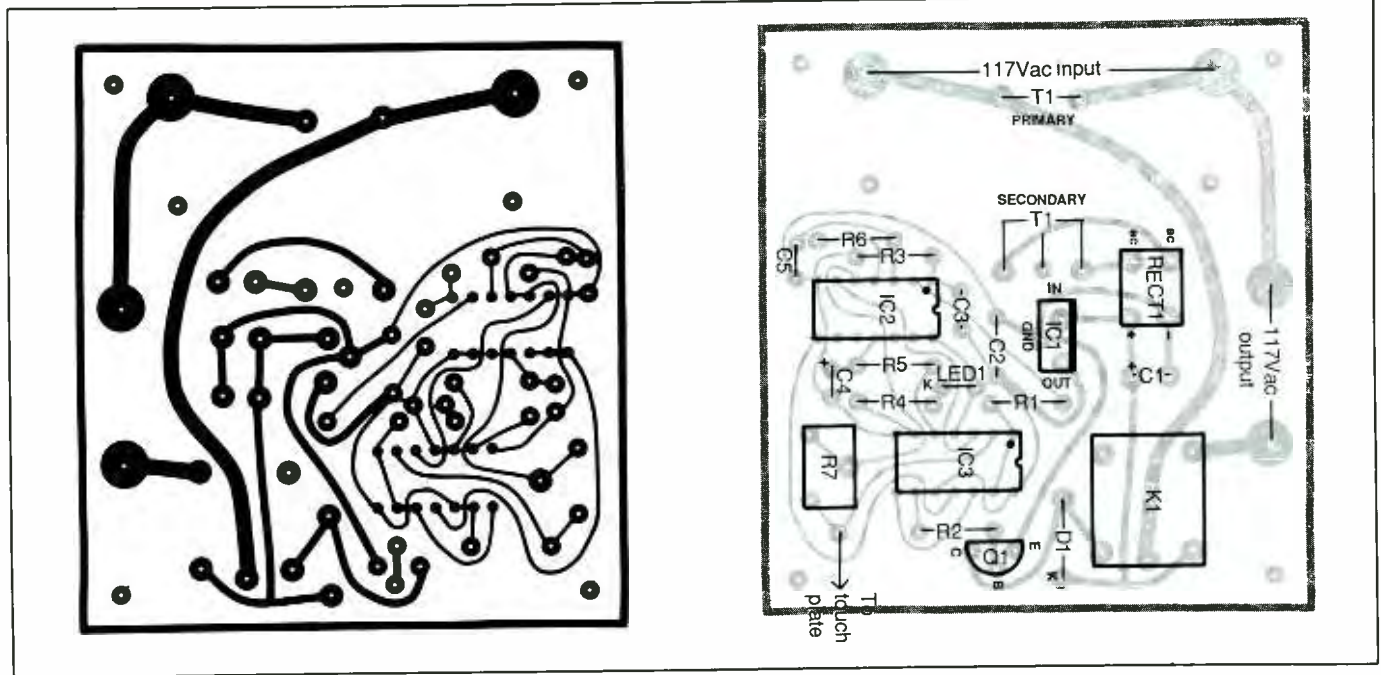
Actual-size etching-and-drilling (left) and wiring (right) guides for printed-circuit board. Use the layout shown as a rough component-placement guide if you use perforated board and soldering or Wire Wrap hardware.
